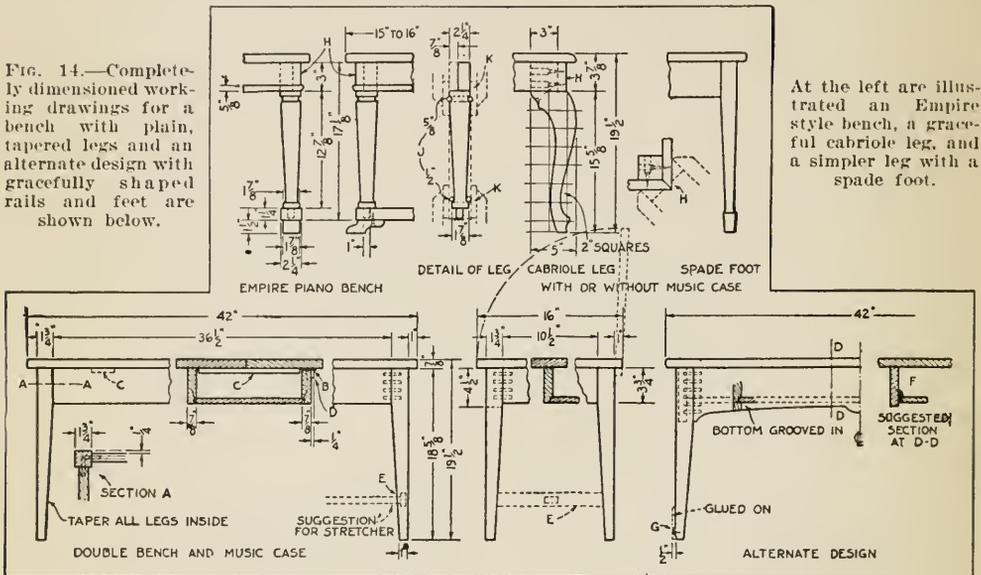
Completely dimensioned working drawings for a bench with plain, tapered legs and an alternate design with gracefully shaped rails and feet are shown below.
